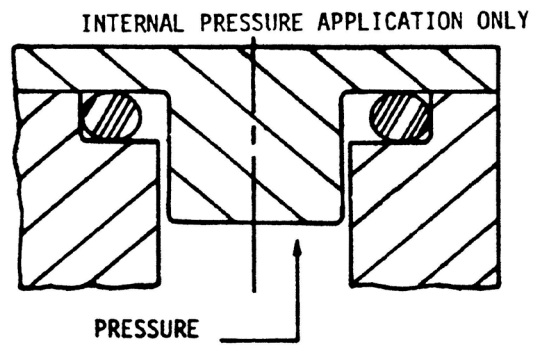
B - O-Ring Seal Axial Glands Alternate Design
